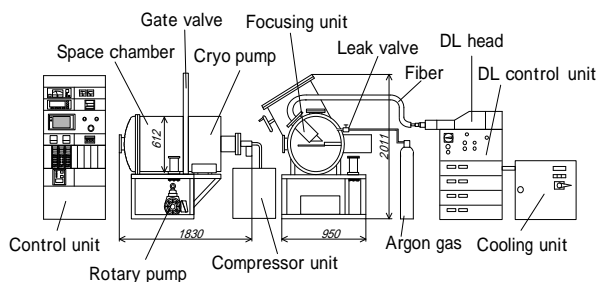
High vacuum diode laser welding experiment system.
